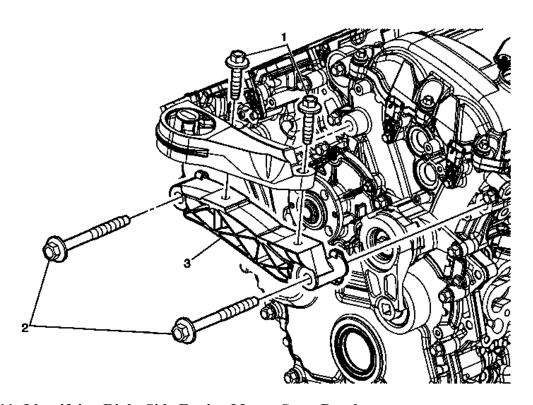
Identifying Right Side Engine Mount Strut Bracket Courtesy of GENERAL MOTORS COMPANY
